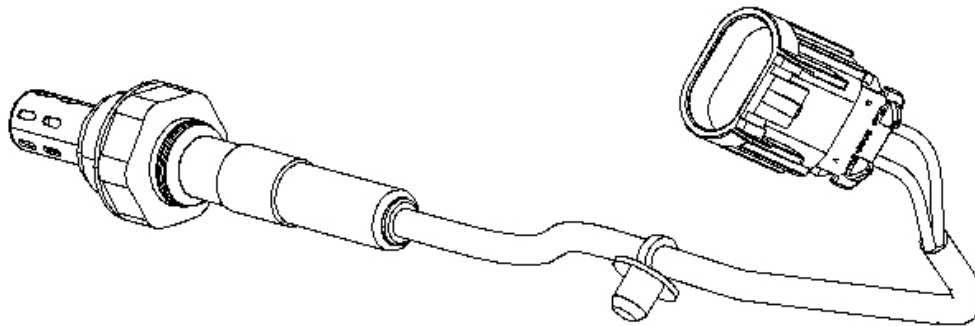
View Of Heated Rear Oxygen Sensor (HO2S-2)
